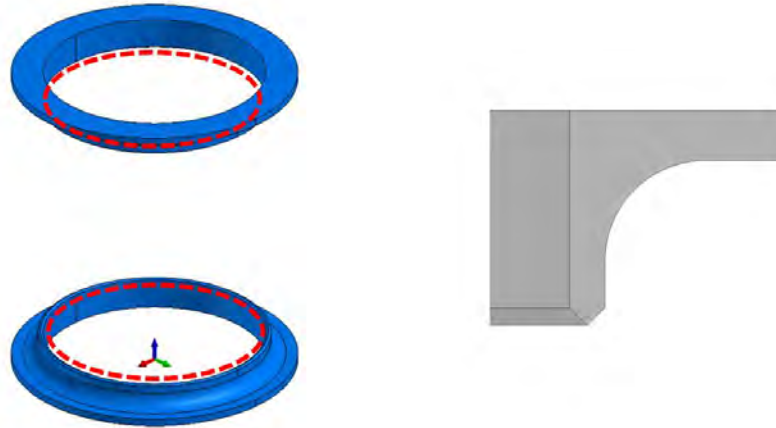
The welds for connecting the forged rings to the inner cylindrical shell and the corresponding bevel shape
